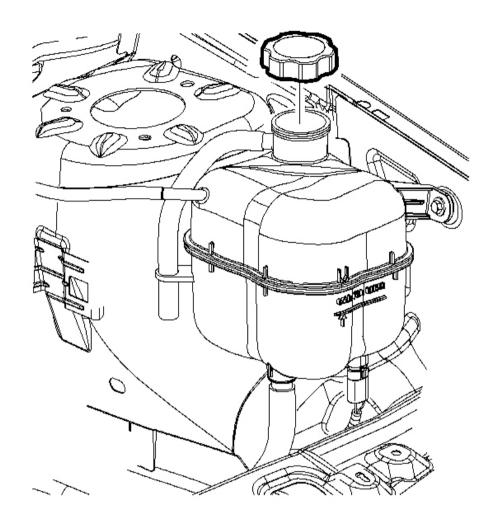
View Of Surge Tank Cap Courtesy of GENERAL MOTORS CORP.
